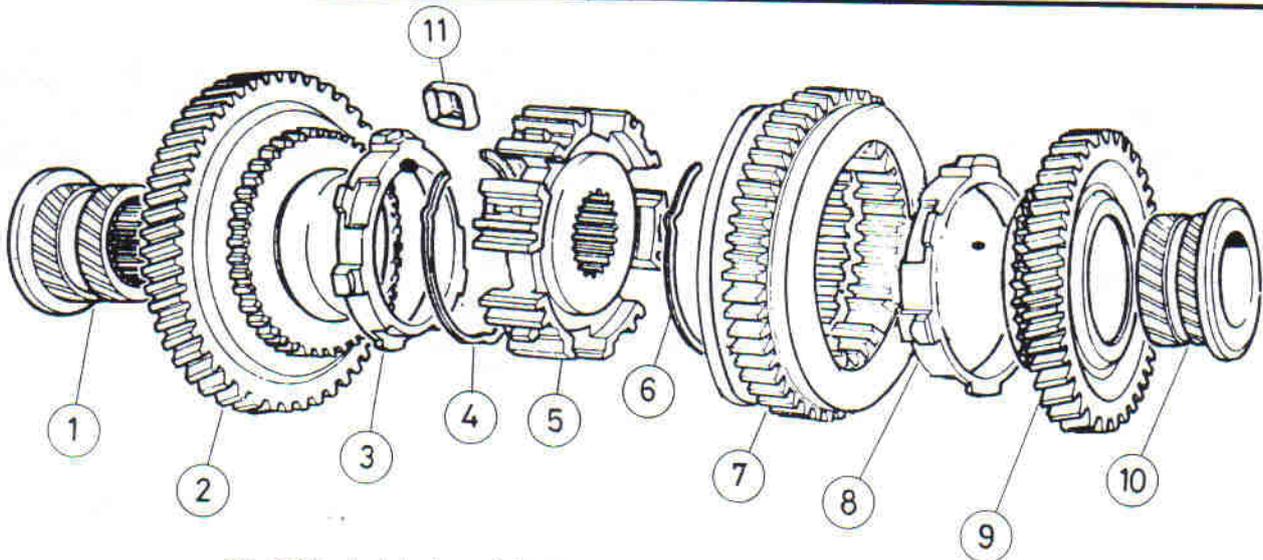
Exploded view of the 1st/2nd gear synchroniser assembly (Sec 6)
